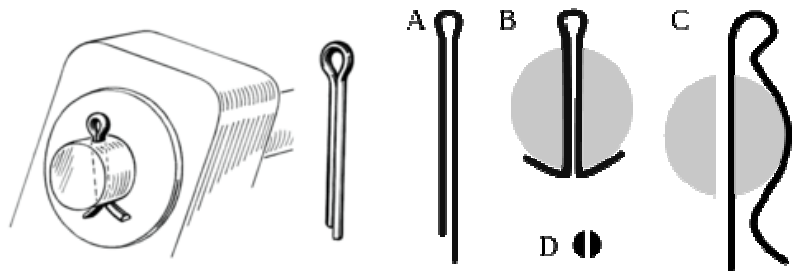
Split pin in shaft. A-new, B-installed, C-spring type, D-cross-section
